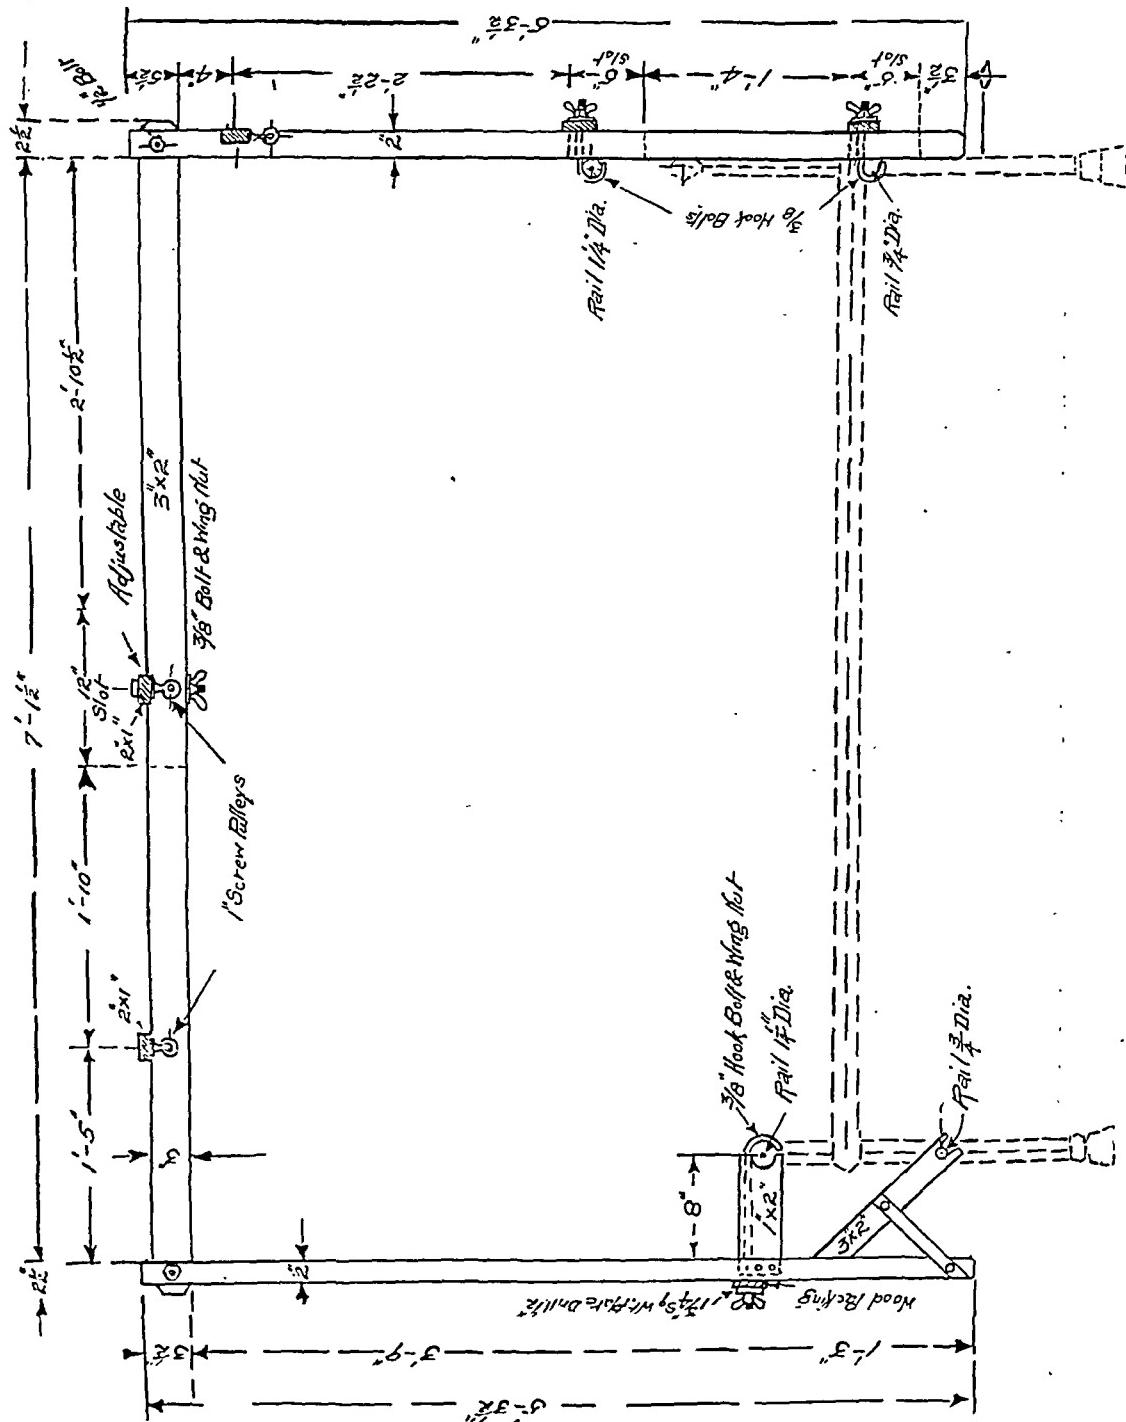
Side elevation of Balkan frame designed to fit standard 6 foot, 6 inch cot, in the construction of which four 7 pound sand bags and 12 yards of blind cord are required. Scale, 1 inch equals 1 foot.
